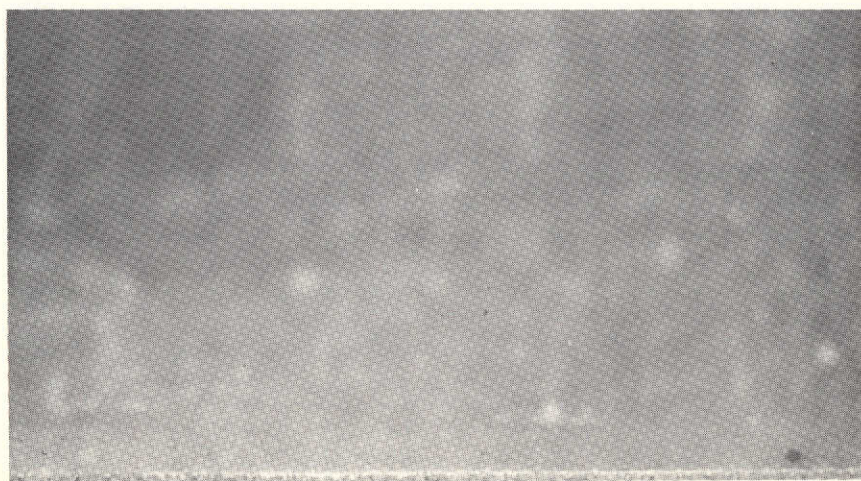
Type F Positive Plate - Uncoined Bottom Edge
